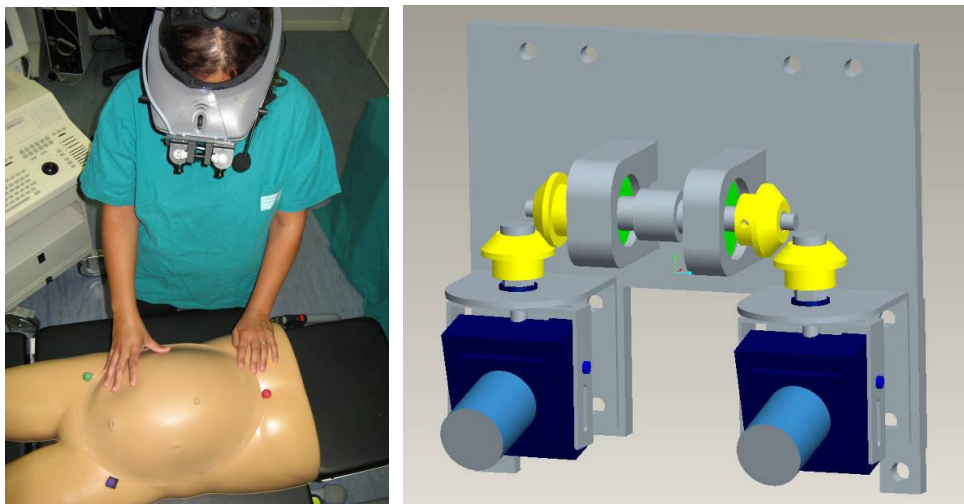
The mechanical support mounting the cameras: prototype (left) and CAD drawings (right).
